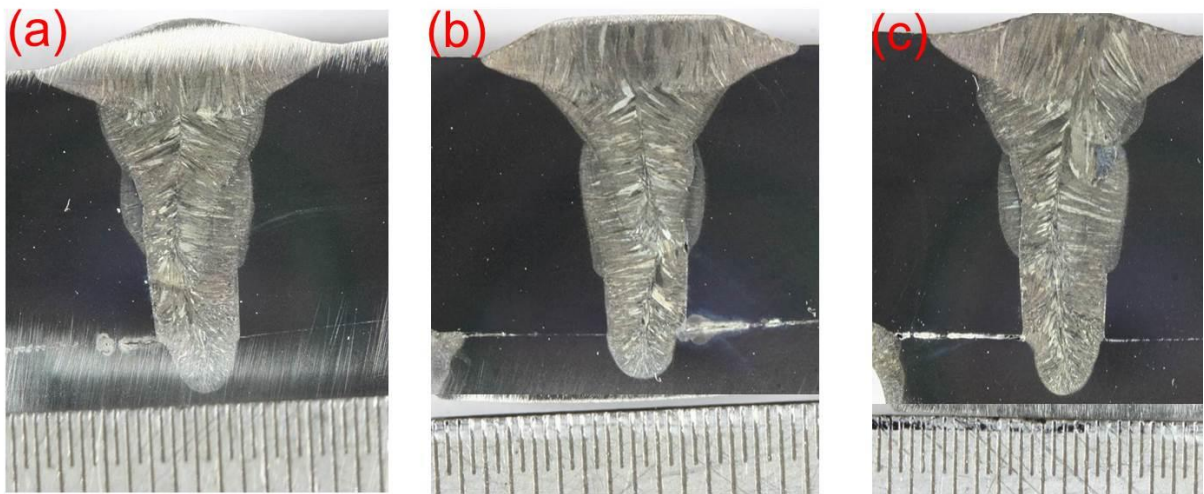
Macrographs of weld bead profiles of 304L austenitic steel (a) as-welded (b) post weld cold rolled (c) post weld cold rolled followed by laser processing
